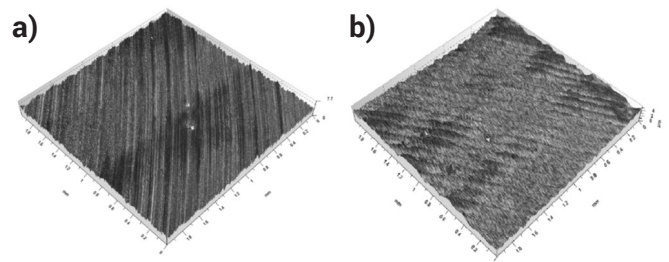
Surfaces after milling and burnishing with the force 800N, with a ceramic ball from ZrO_2 with a diameter of 10 mm on the milled surface of the cross feed: a) 0.3 mm, b) 0.5 mm [15]
